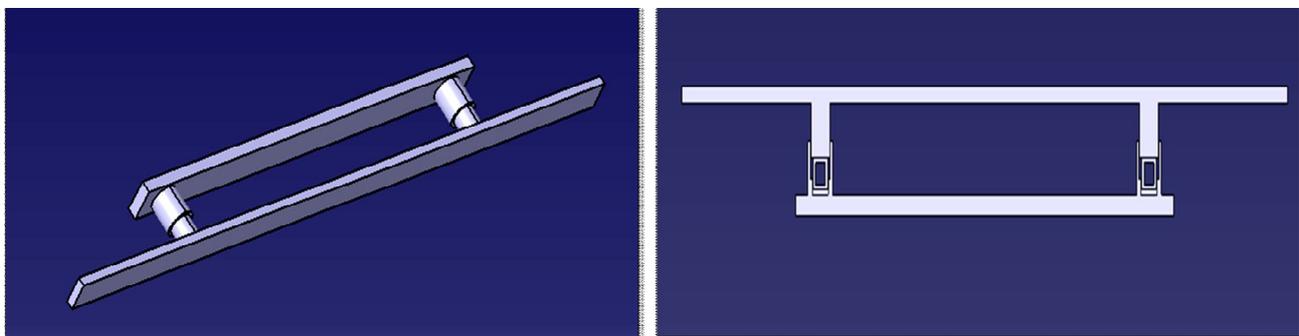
Image of Modelling and section view of Assembly Safety Impact Guard
